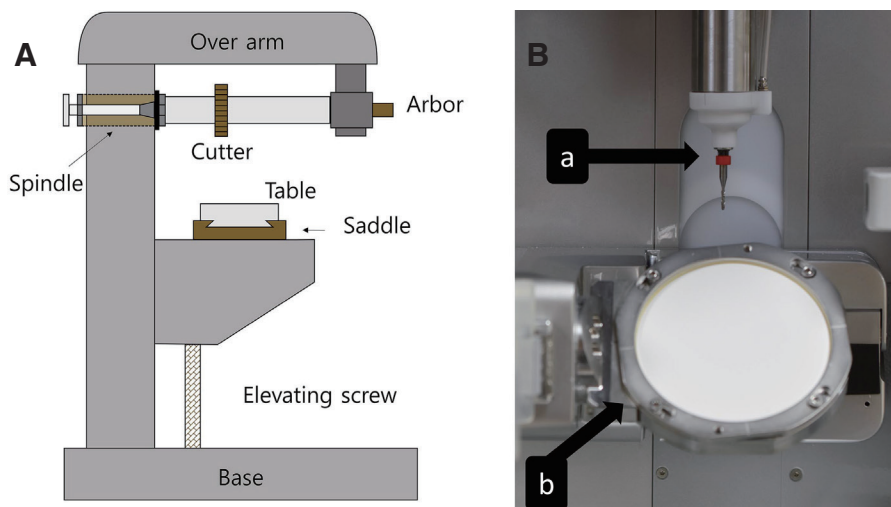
Milling machine. (A) Schematic diagram, (B) Five-axis dental milling machine. a: Spindle and milling bur, b: Table and milling block.
